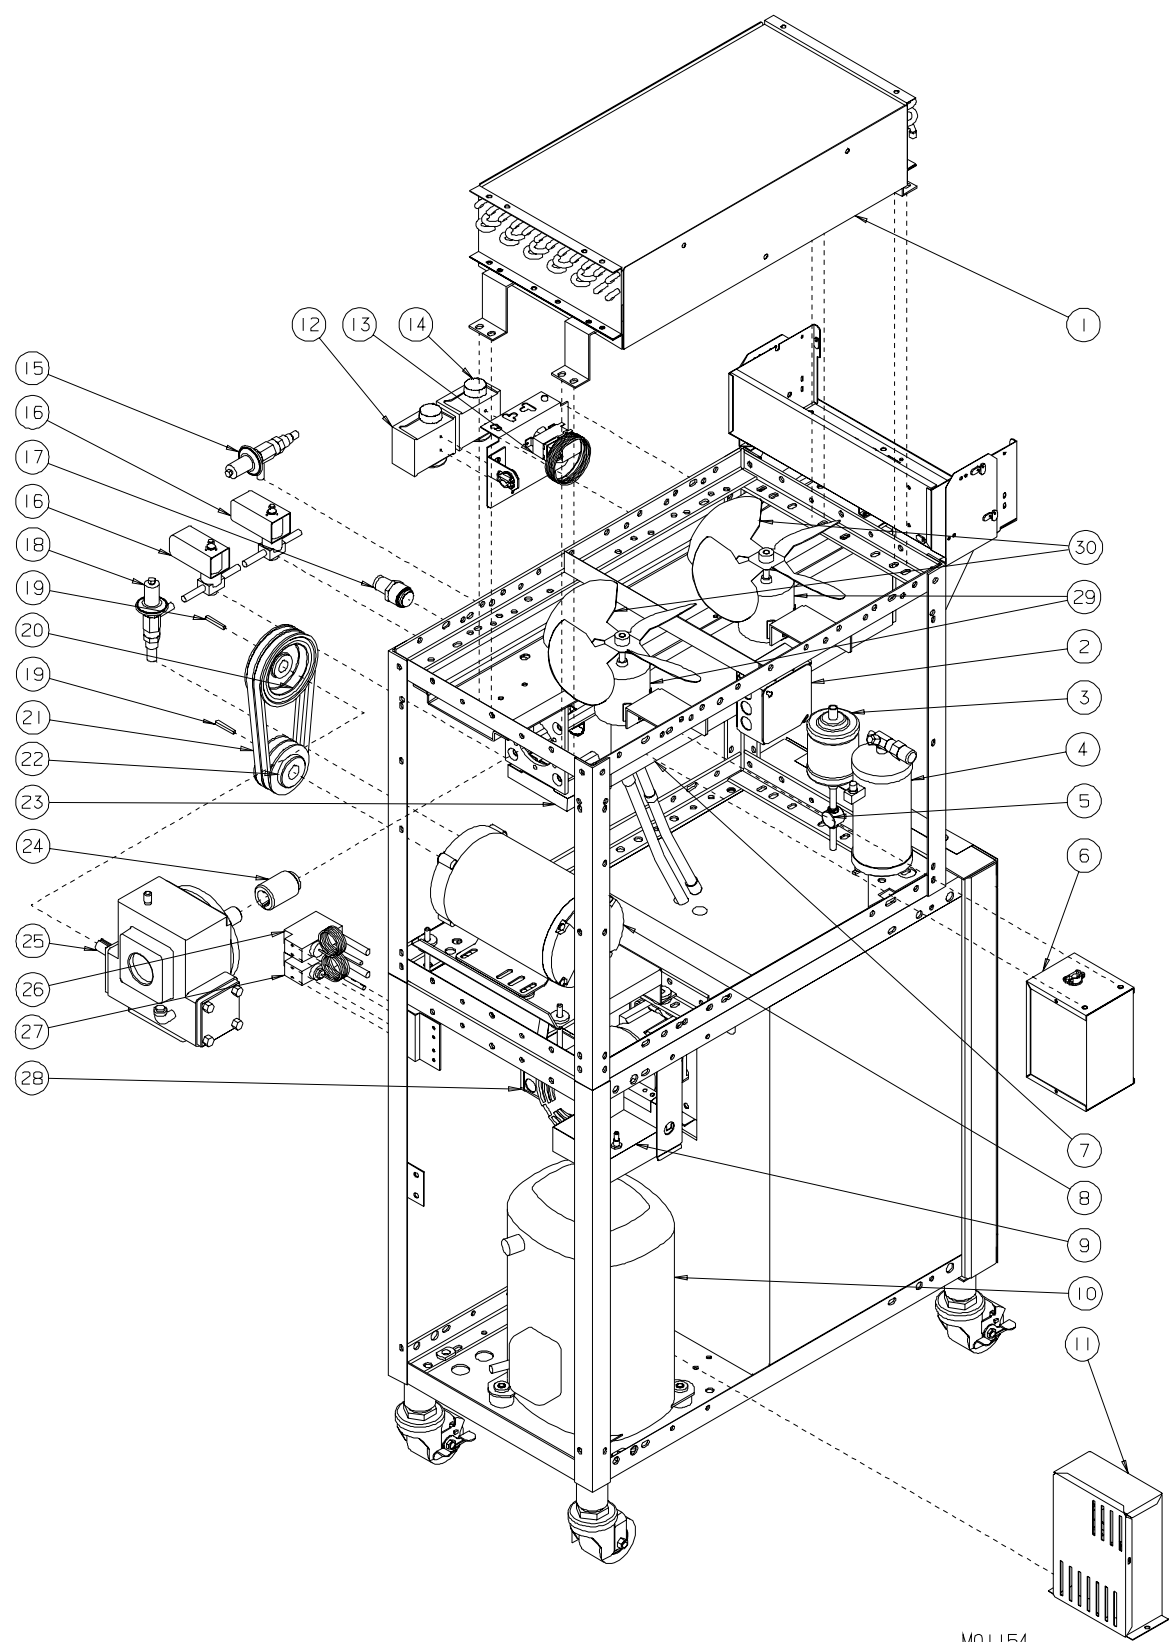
917N-CMT Panel Assembly (sheet 2 of 2)
